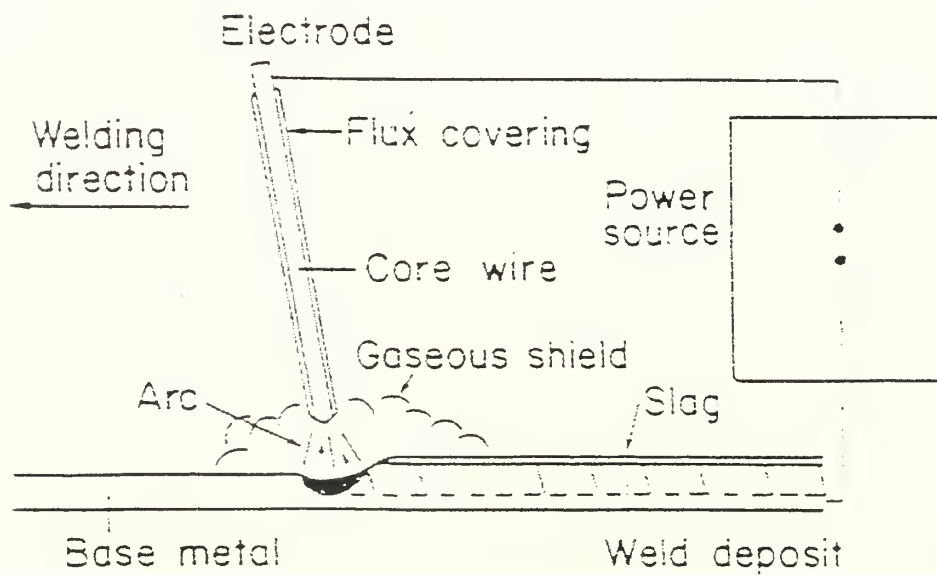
SMAW welding process [Ref. 4]
